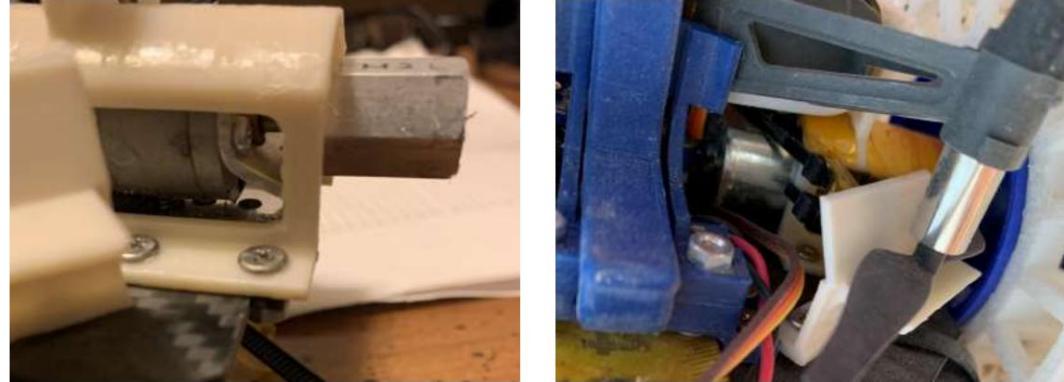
Deformed motor bracket Figure 9.20 Motor damage caused by cutting cable ties
